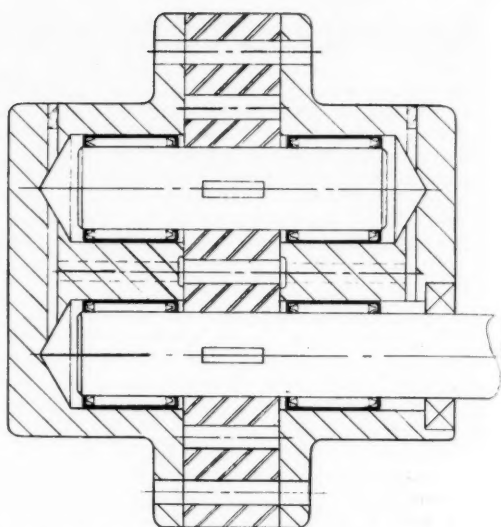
Rugged gear pump service requires bearings with high radial capacity and small cross section
